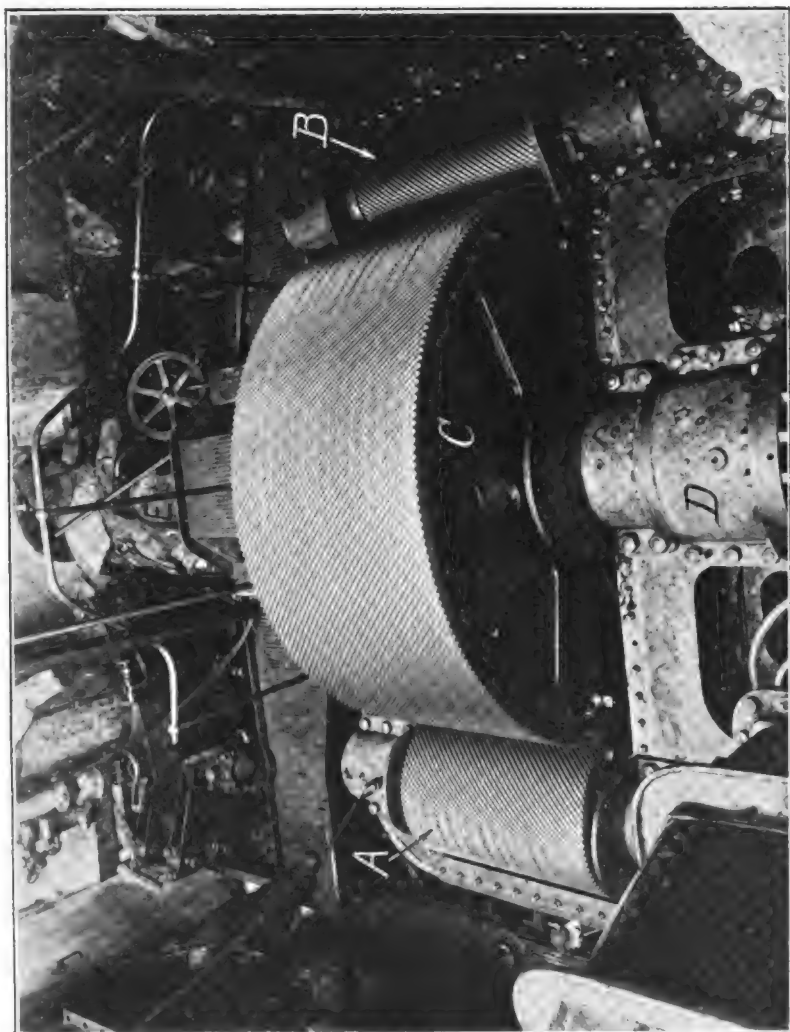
PLATE II.—PORT REDUCTION GEAR, LOOKING AFT. UPPER CASING REMOVED.
